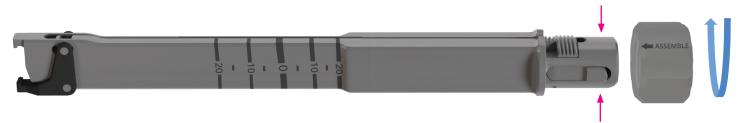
Assembling the Knob while holding down the buttons on both sides, then rotating it clockwise over the threads.
